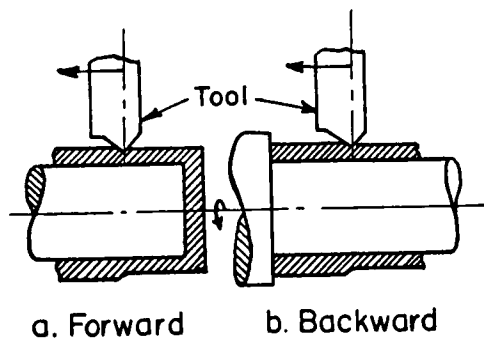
SCHEMATIC OF TUBE SHEAR FORMING (REF. 51)
